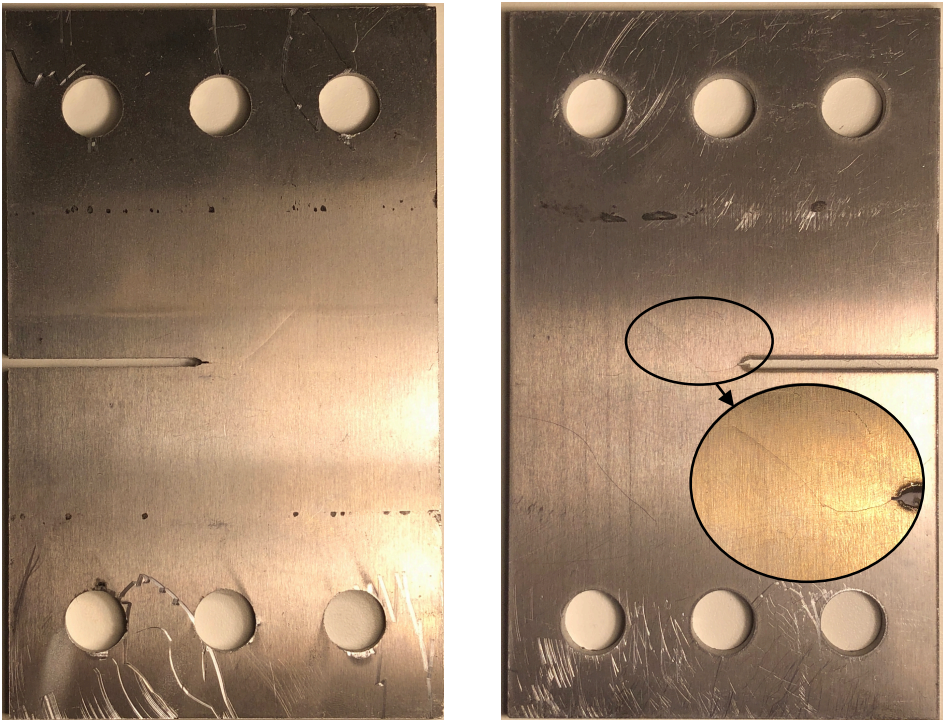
Pictures of specimen number 3 after testing. The front side of the specimen is shown to the left.
